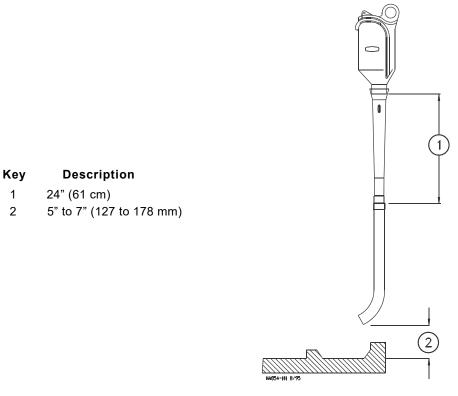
Tapered Drop Tube for Hog Installation (side view)
